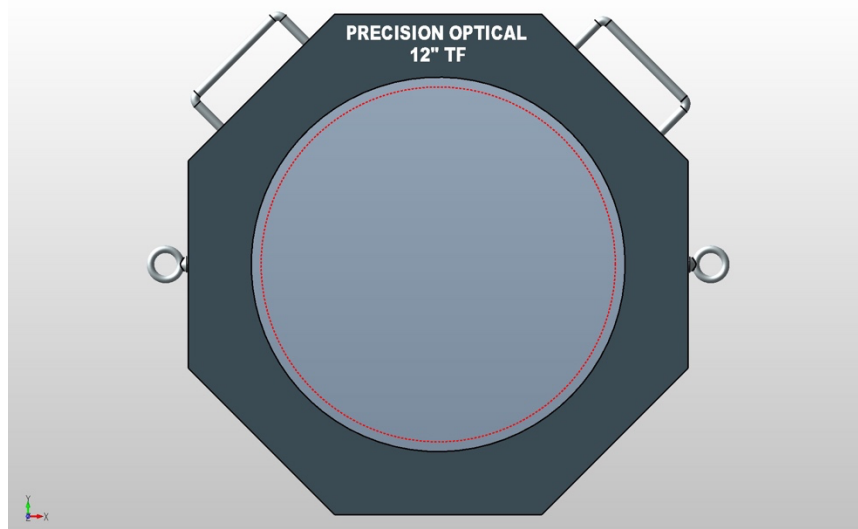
Fully Assembled Transmission Flat into Mount. The Mount is made out of 6061 T6 Aluminum, and is used hold the flat in place I which the optical axis of the collimating lens will line up with the primary optical-axis of the main flat.
